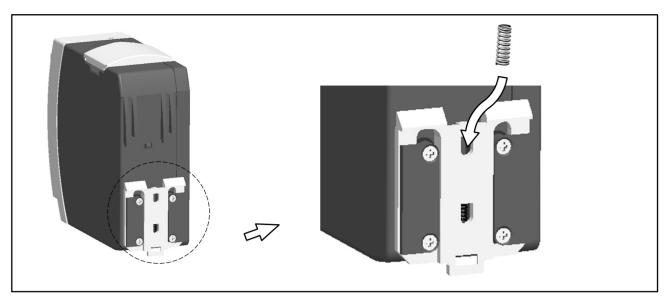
Fitting a second spring for a more stable module mounting on the DIN rail
